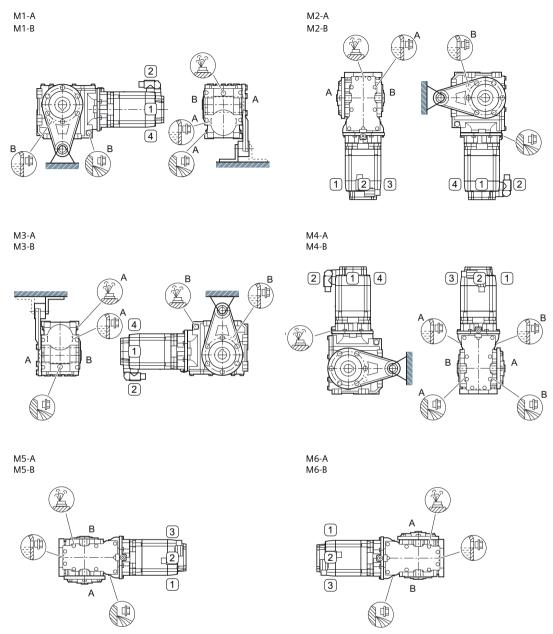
Mounting positions for servo helical worm geared motor CAD, shaft-mounted design, frame size 39A, 2 stage
